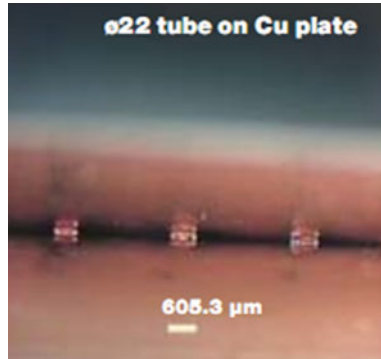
Solar thermal plate collector Cu plate—Cu tubes laser welded [68]
